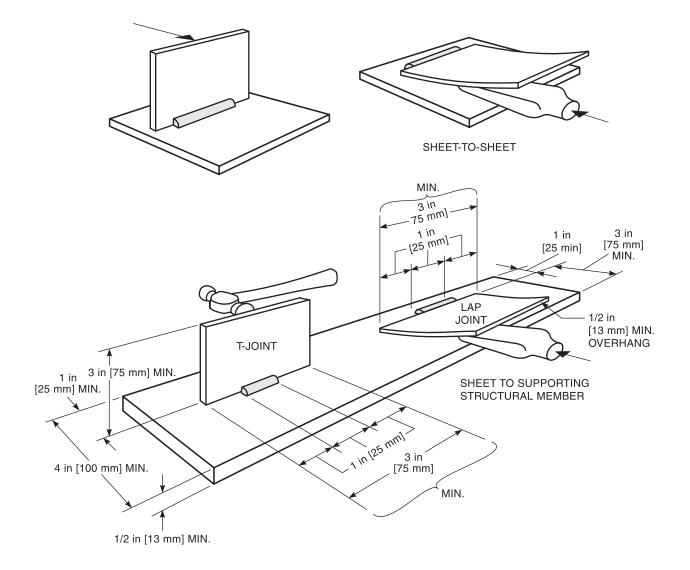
A—Test for Fillet Welds [see 4.6.2.2(1)]
